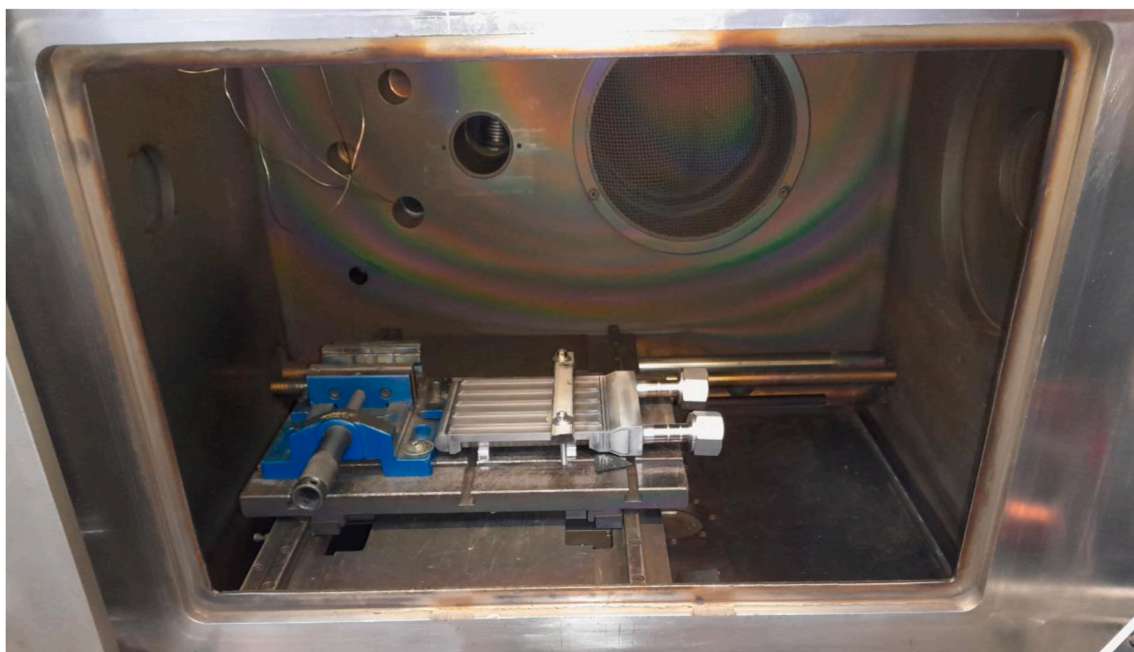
Target final EBW; fixed on x/y table in EB machine EBW300
